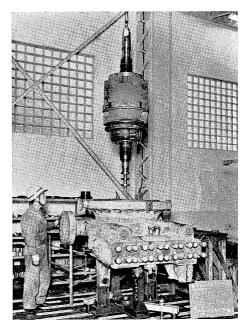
Assembling of casing and stationary blade holder of pot type turbine (chemical industry) 5300 kw backpressure turbine 84 kg/cm²g 510°C backpressure 10 kg/cm²g 6000 rpm
